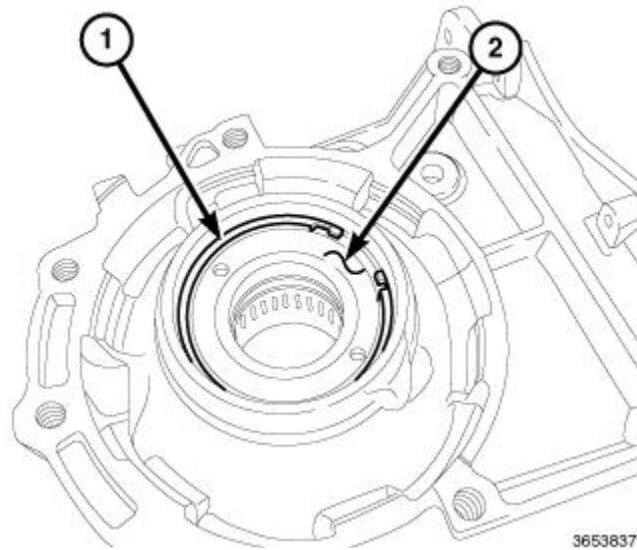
Outer Bearing Snap Ring & Outer Needle Bearing
